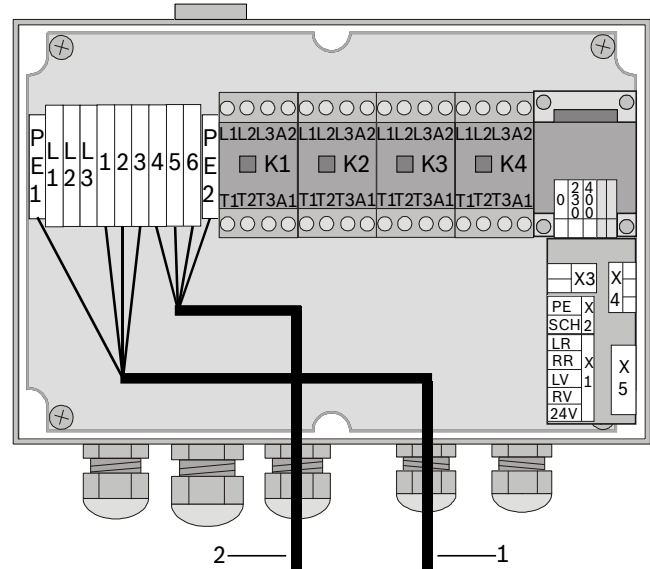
Power section 230 V / 400 V AC / 5 kW (QD-3030) with 2 motor cables to the roller set
